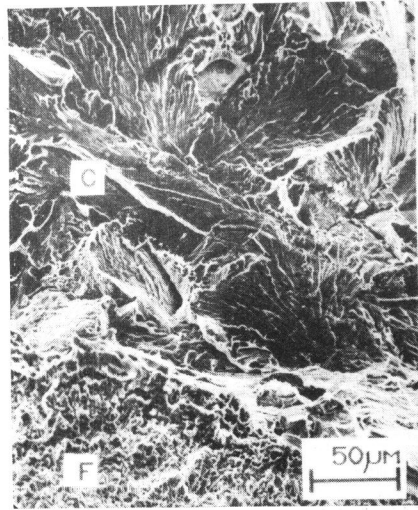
Cleavage (C) in overmatched weldment OM-6 next to fatigue pre-crack (F).
